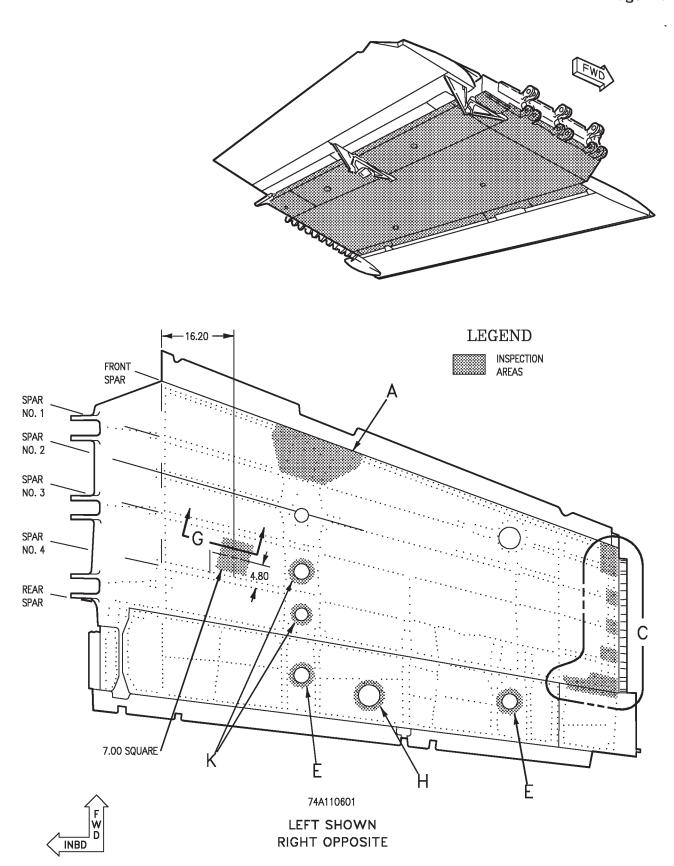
Inner Wing Lower Surface Solid Composite Laminate and Door Sill Inspection Areas (Sheet 1)
